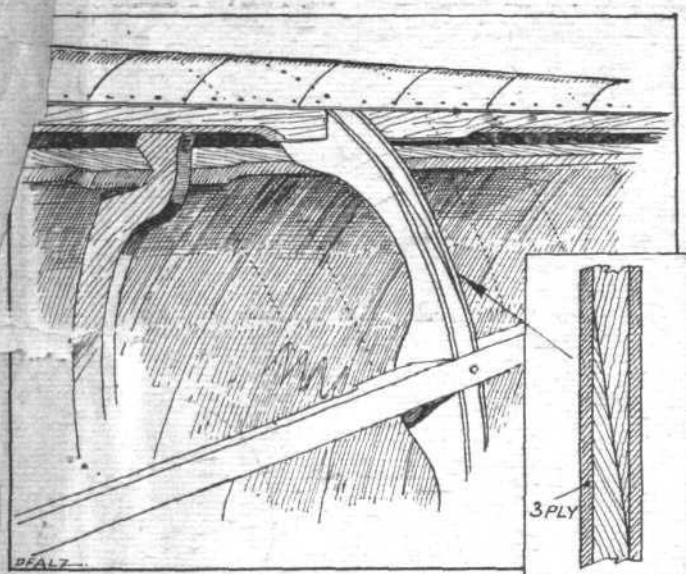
Sketch showing construction of body former and attachment of longeron.
